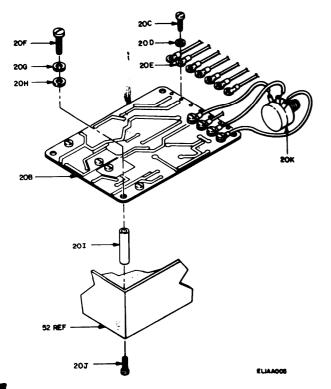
(Sheet 2 of 2) Inverter with 4B93-1-A Regulator exploded view
